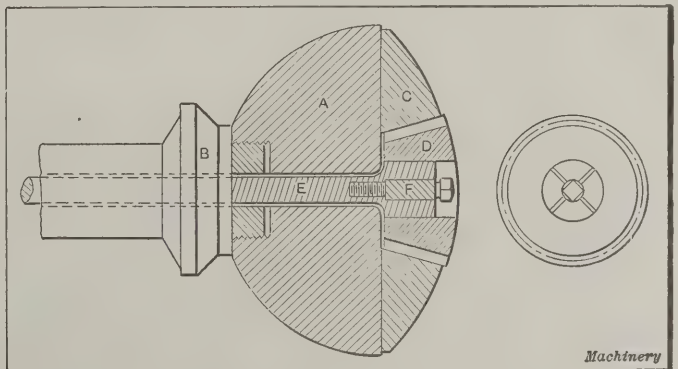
How the Gears are held True with the Boss when grinding the Spherical Faces
